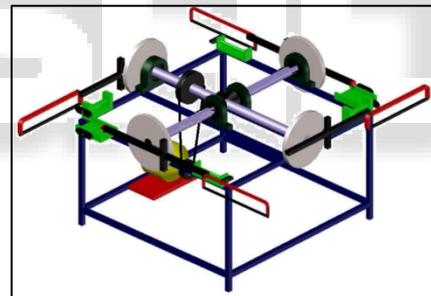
4-way Hacksaw Machine with Shaper Attachment
